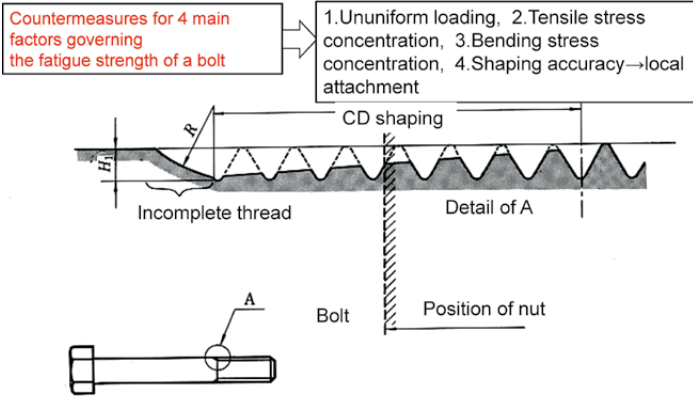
Typical shape of anti-fatigue bolt (CD bolt)
